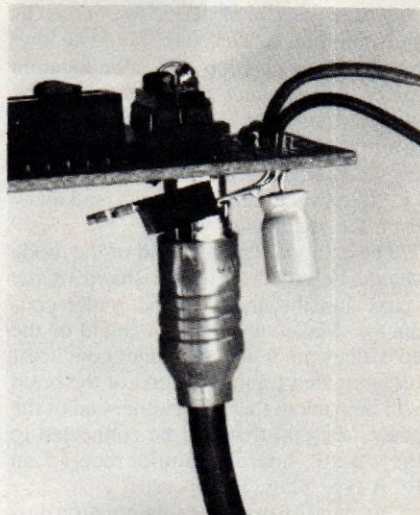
BEND IC1 OVER BACKWARD on the bottom of the board as shown.
